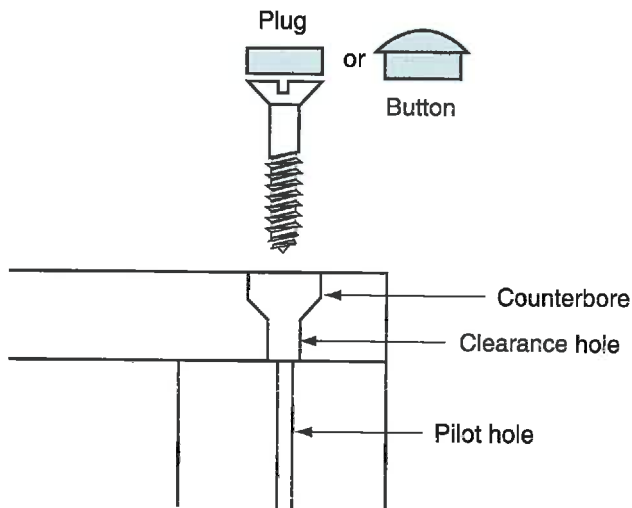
A plug or button covers the screw in a counterbored hole.
